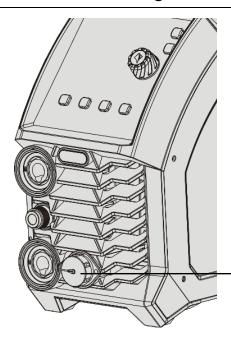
Connection of welding torch, earth cable and gas cylinder NOTE! If you want to use long secondary cables (TIG torch cable and earth cable), you must ensure that the cross-sectional area of the cable is increased appropriately in order to reduce the voltage drop due to the cable length.
